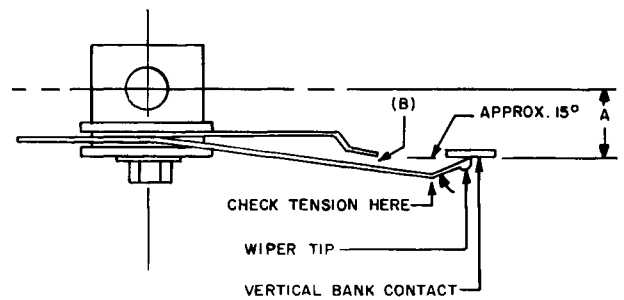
Top View of Vertical Wiper Showing Proper Alignment and Clearance.
